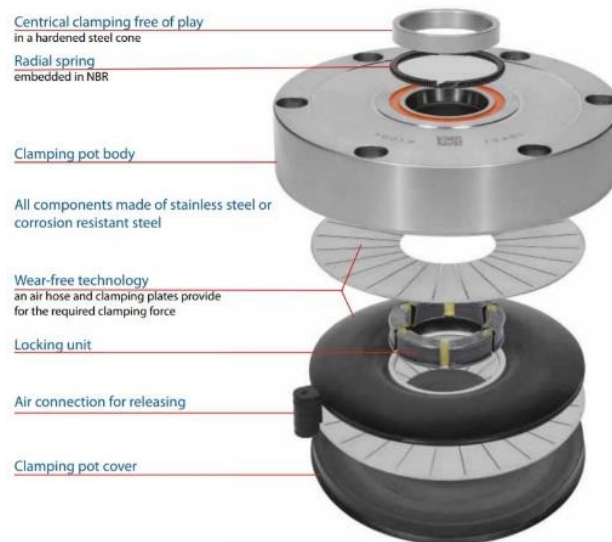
Zero clamping system in exploded view and assembly view [34].
